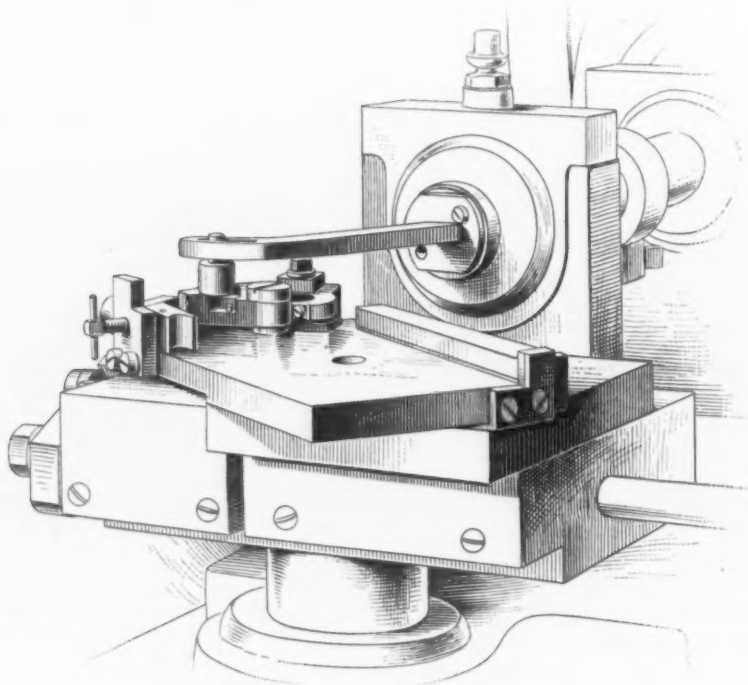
View of Fig. 7 with Pistol Receiver Removed.
